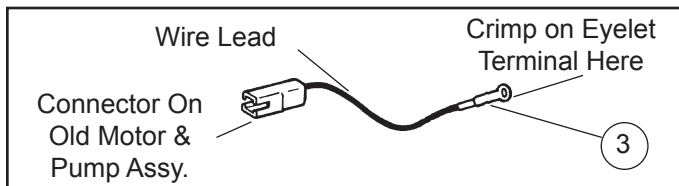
Wire Harness from Old Style Motor & Pump Assembly
